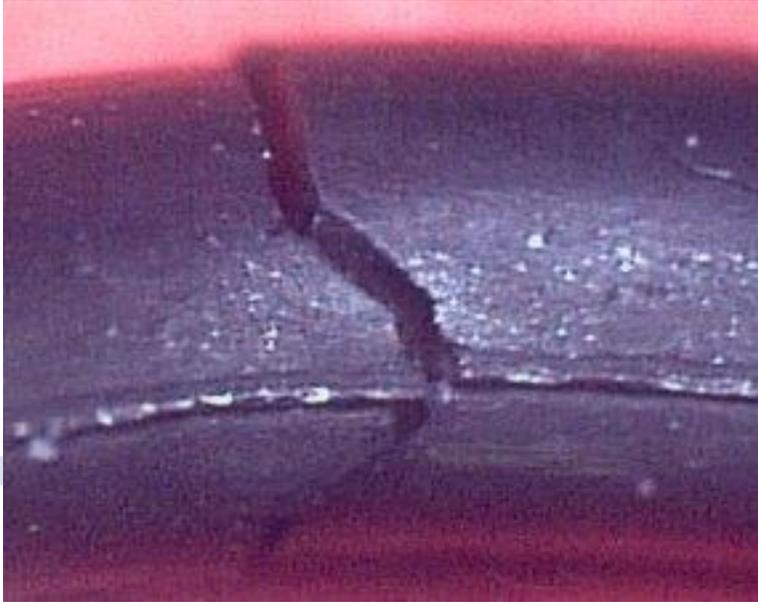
Manufacturing crack, parabolic and symmetrical to the mold parting line
